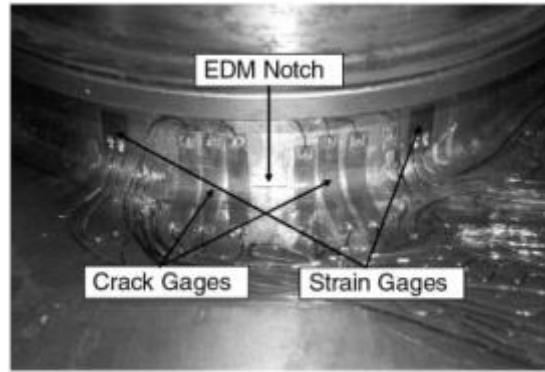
Instrumentation for measuring the progression in length of a crack and certain localized strains on the root of a planet gear mounting post of a planetary carrier plate with a seeded fracture. The fracture “seed” is a small notch generated through electrical discharge machining (EDM). Reproduced from Vachtsevanos et al. (2006)
